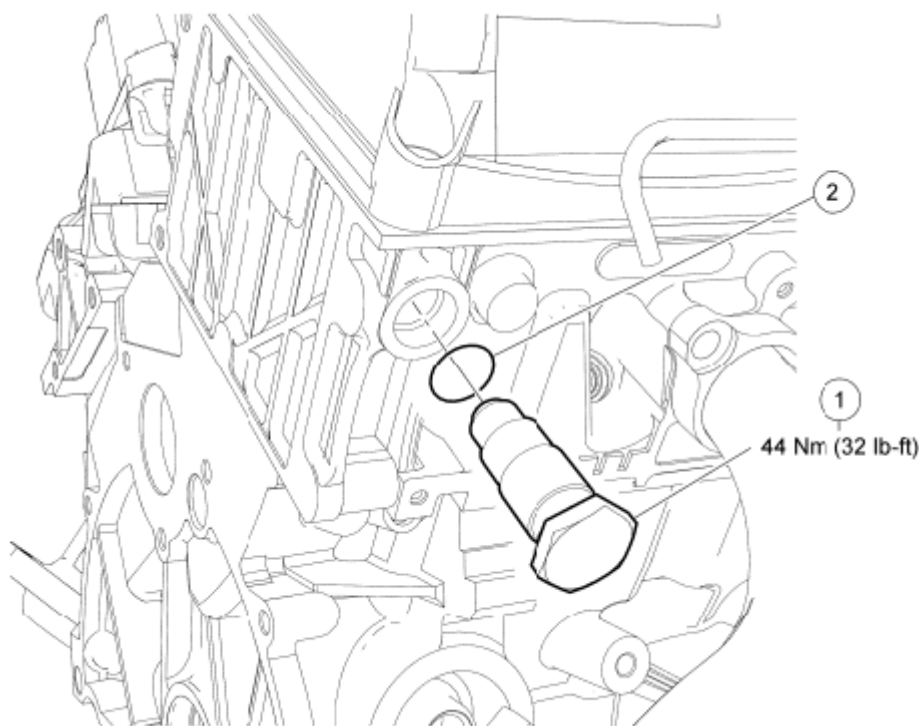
Identifying Hydraulic Timing Chain Tensioner RH With Torque Specifications
